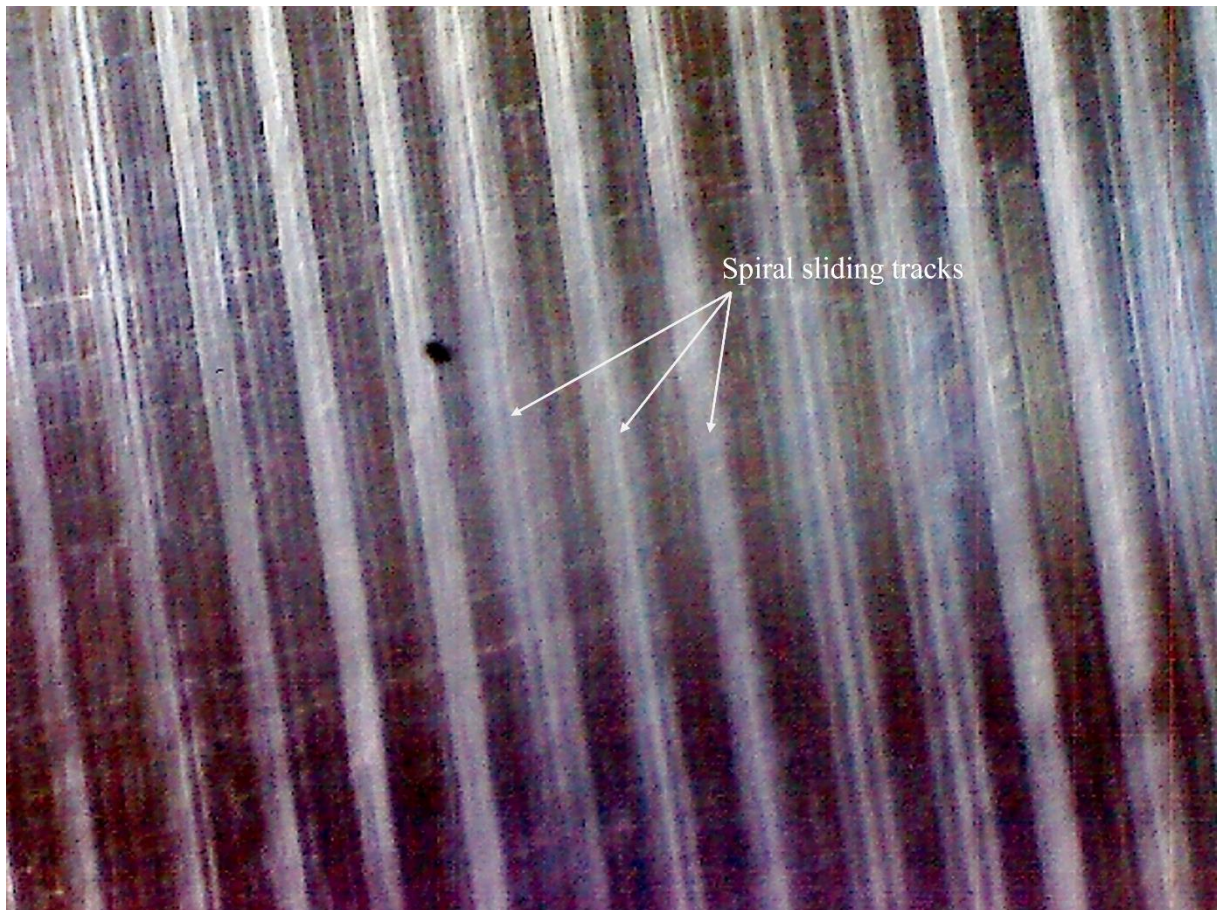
Spiral sliding tracks generated by WC-Co cemented carbide pin on AlumeC 89 workpiece surface during open pin-turning.
